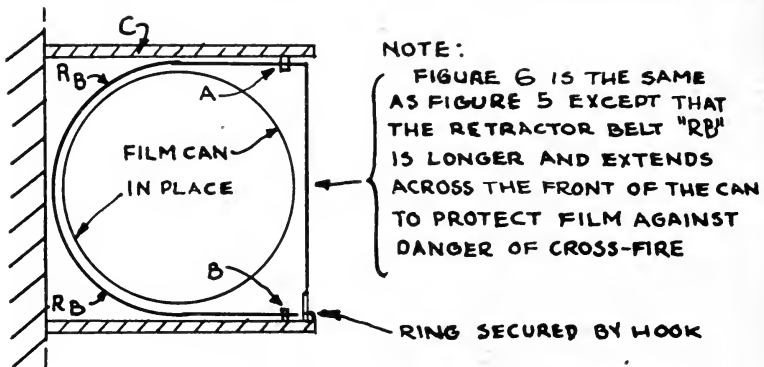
Plan. A, positioning slot; B, anchor rivets; C, cross section of partition.
